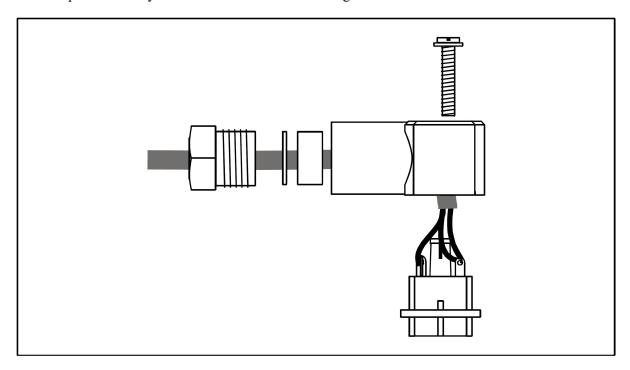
Air Pressure Transducer Cable: Completing Connector Assembly
